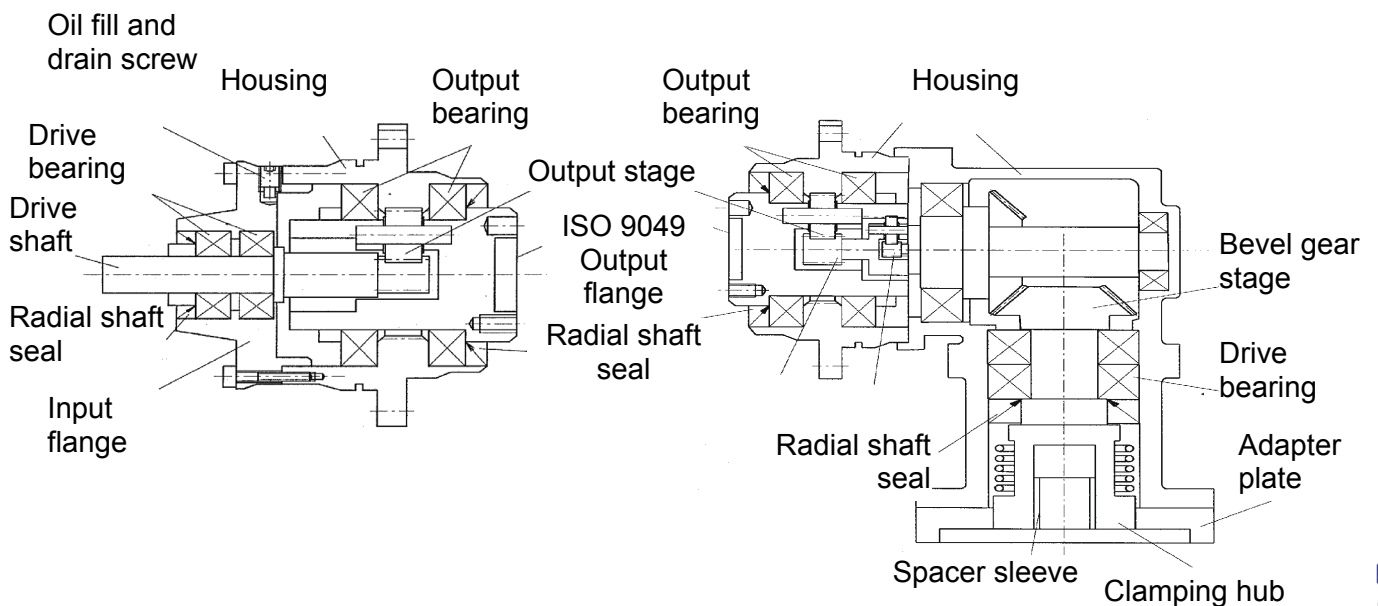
shows the single stage version “S” and the three stage version “K”
